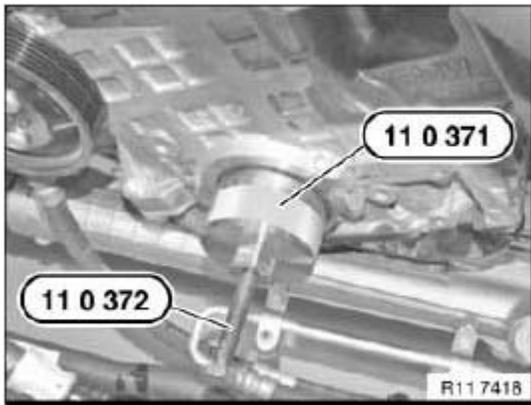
Mounting Special Tool 11 0 371 Into Crankshaft Seal
